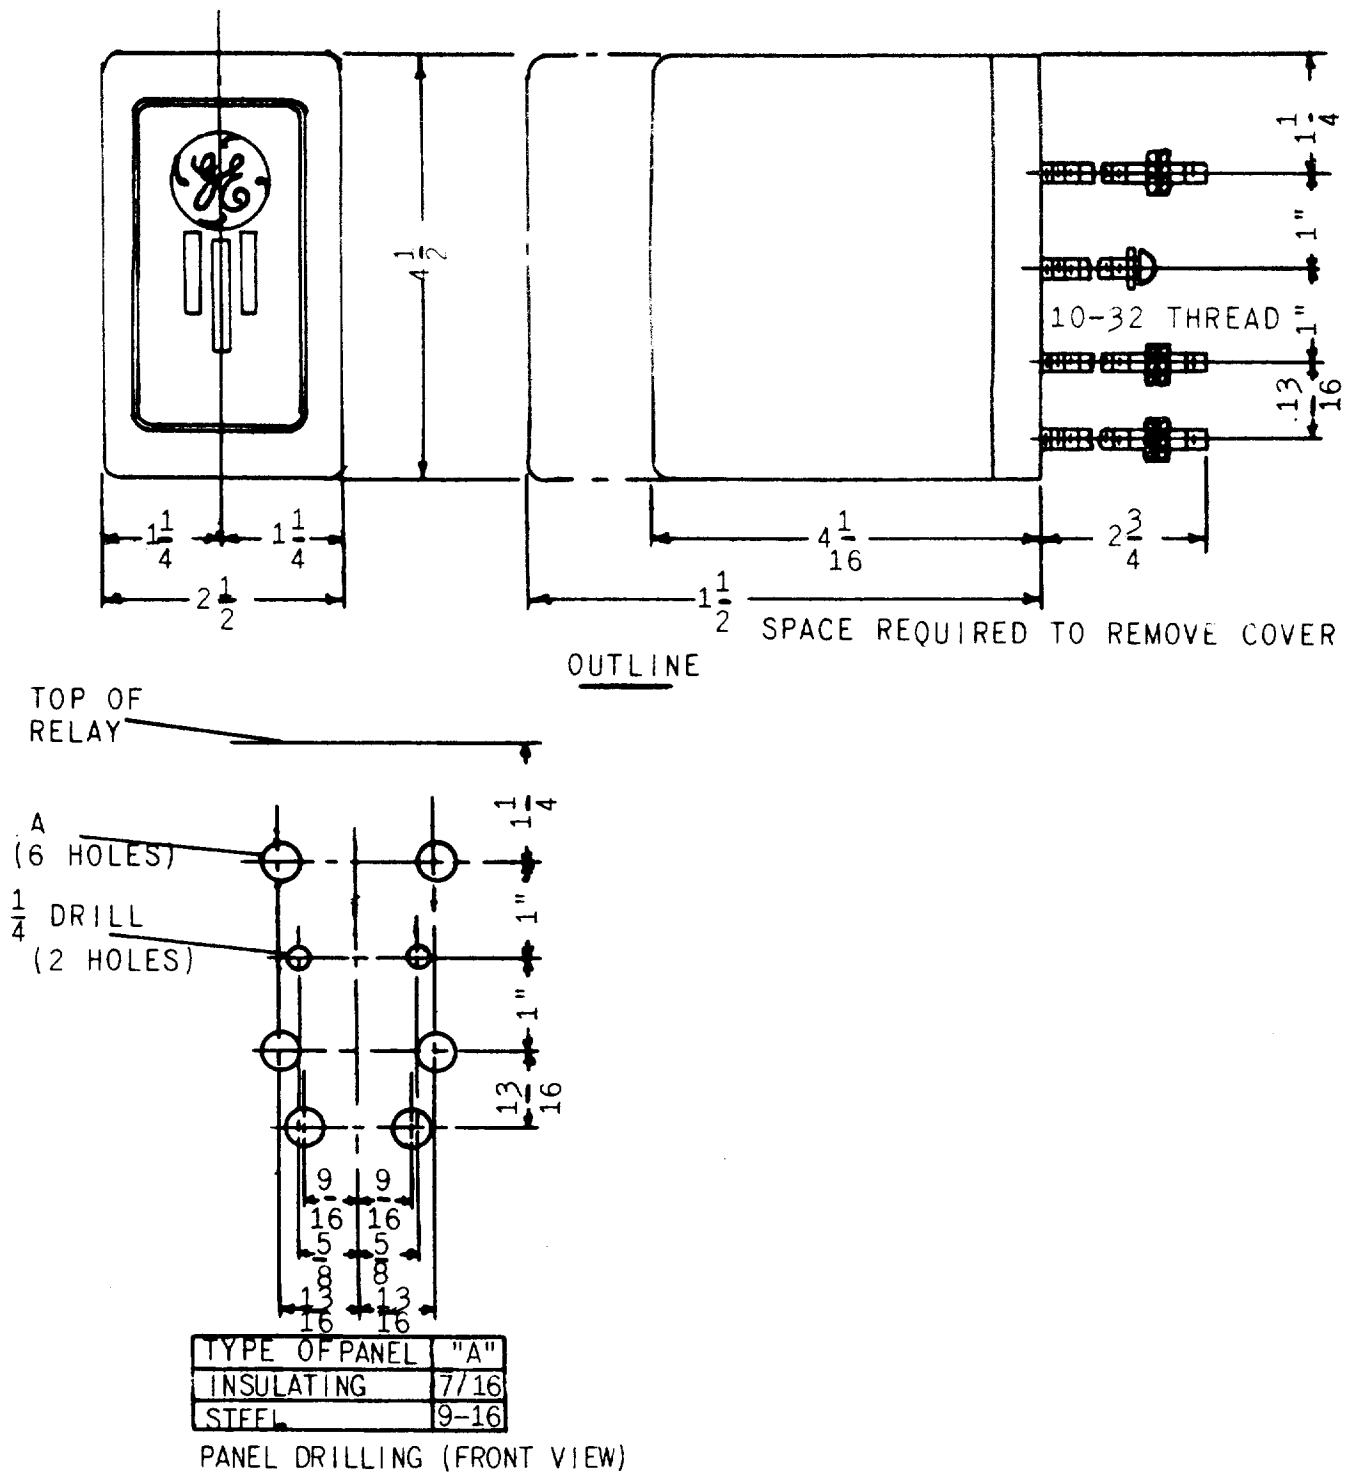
(06400409-002) Outline and Panel Drilling for Surface Mounting of HGA17F Relay
